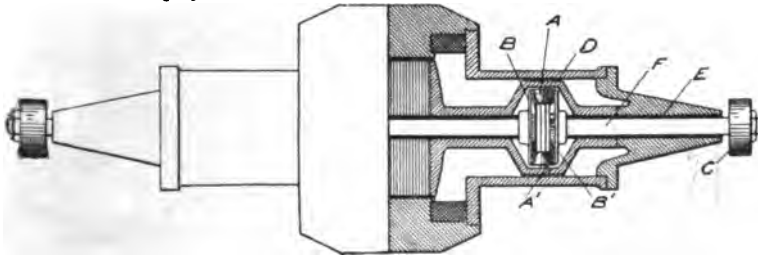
Part Sectional Diagram of a Single Motor, arranged for driving both wheels through differential gear. A and A' are the pinions of the differential gear; B, the bevel gear of the left-hand road wheel; D, bevel gear on right-hand road wheel; C, spur pinions driving internal gear on road wheels; E, sleeve on rotating through shafts, F, of pinions, C and C.
